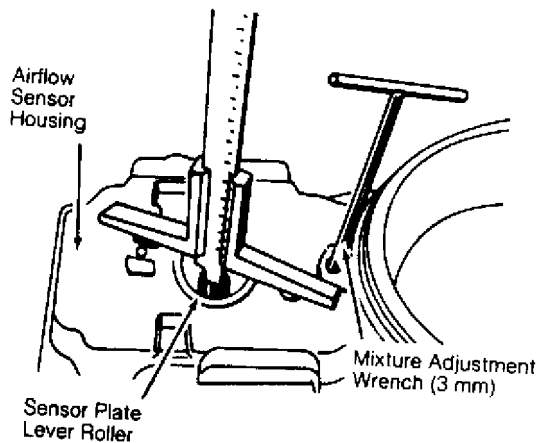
Adjusting Sensor Plate Lever On Airflow Sensor Housing
